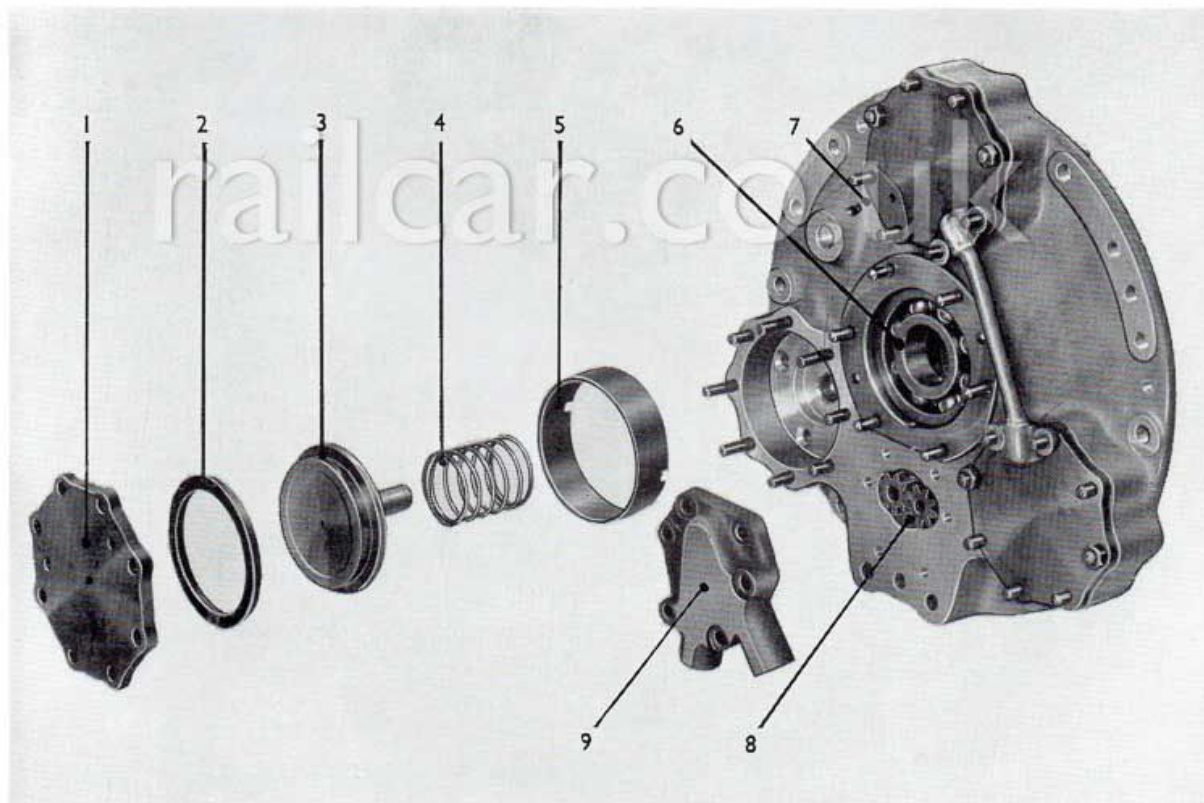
VIEW OF TOP SPEED PISTON ASSEMBLY AND OIL PUMP.
